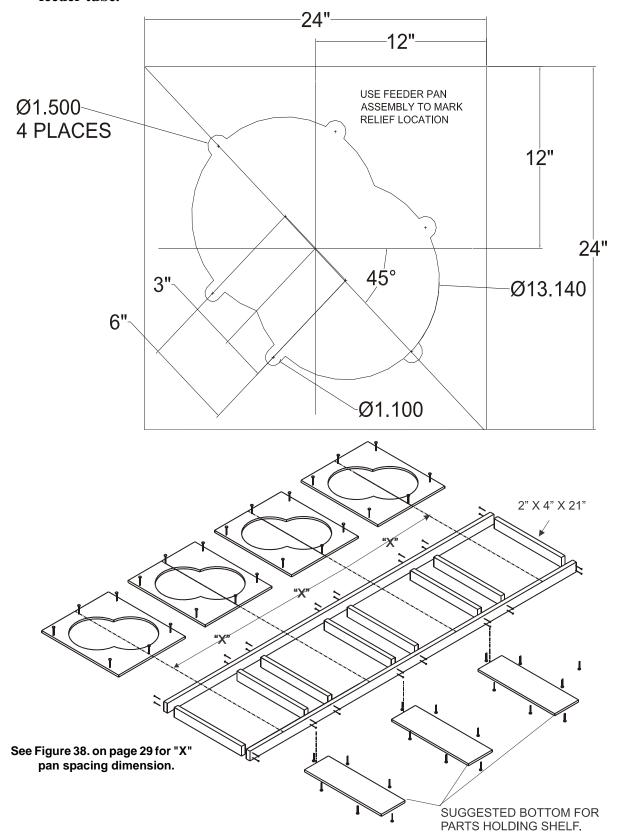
Feeder Pan and Tube Assembly Fixture Construction
